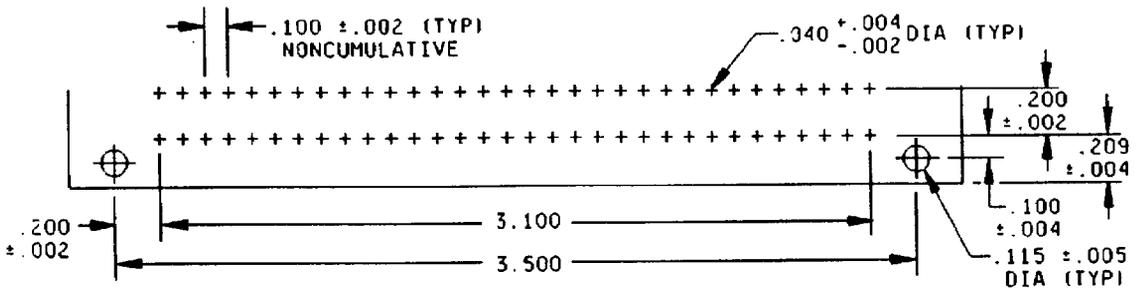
DETAIL C OPTIONAL DESIGNS FOR PRINTED CIRCUIT TAILS
